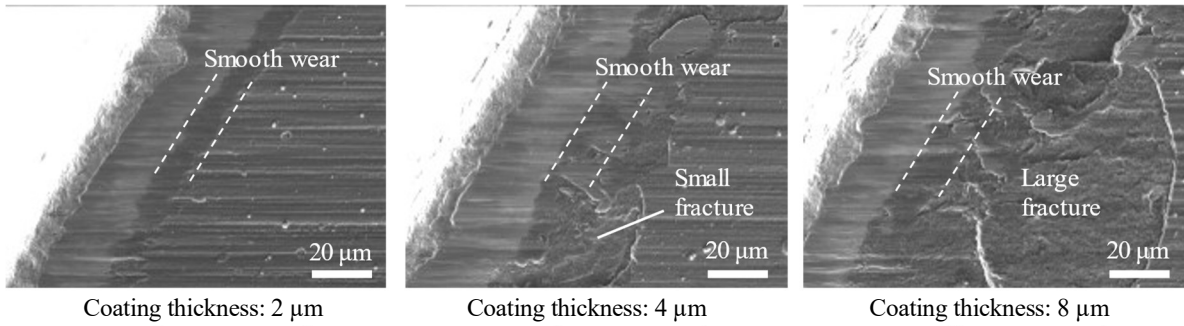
SEM observation images of the coated cutting edges on the flank face after machining of Alloy 718. TiN coated end-mill tools, cutting speed $V = 40$ m/min, feed rate $f = 0.04$ mm/tooth, $a_p = 6$ mm, $a_c = 0.3$ mm, cutting length $L = 0.2$ m, coating thickness: 2 μm , 4 μm , 8 μm respectively.
